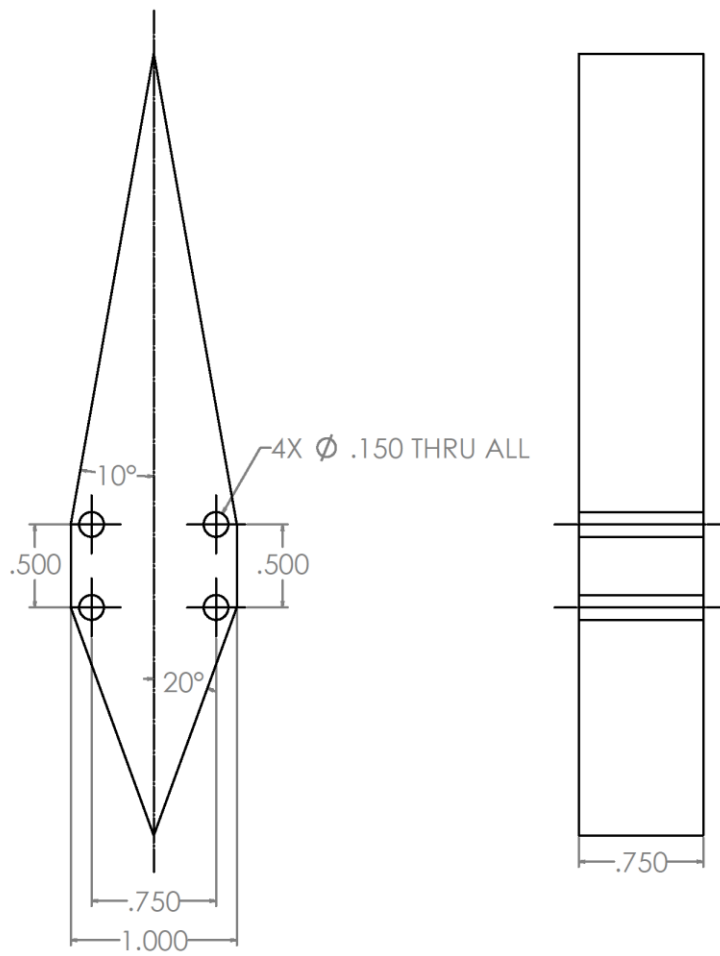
Drawing of Mach stem generator wedge model bottom outer strut.
